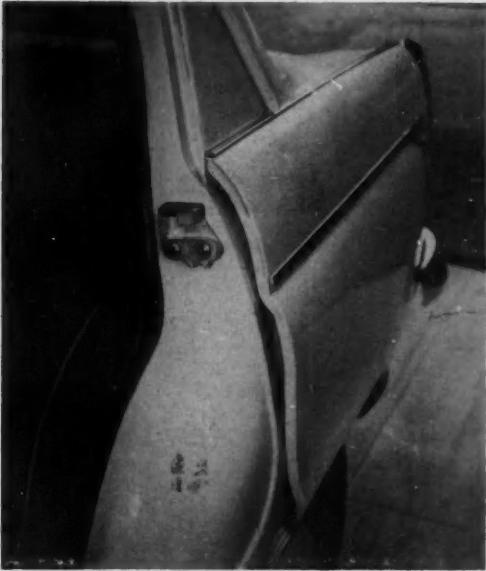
Rear fenders can easily be removed for repair or replacement. No sound control material was used under panel. Windlace is an extruded U section covered with velour, which is snapped over a flange, resulting when inner and outer panels are spotwelded together. Door latches are not the "safety" design now used in our cars.
